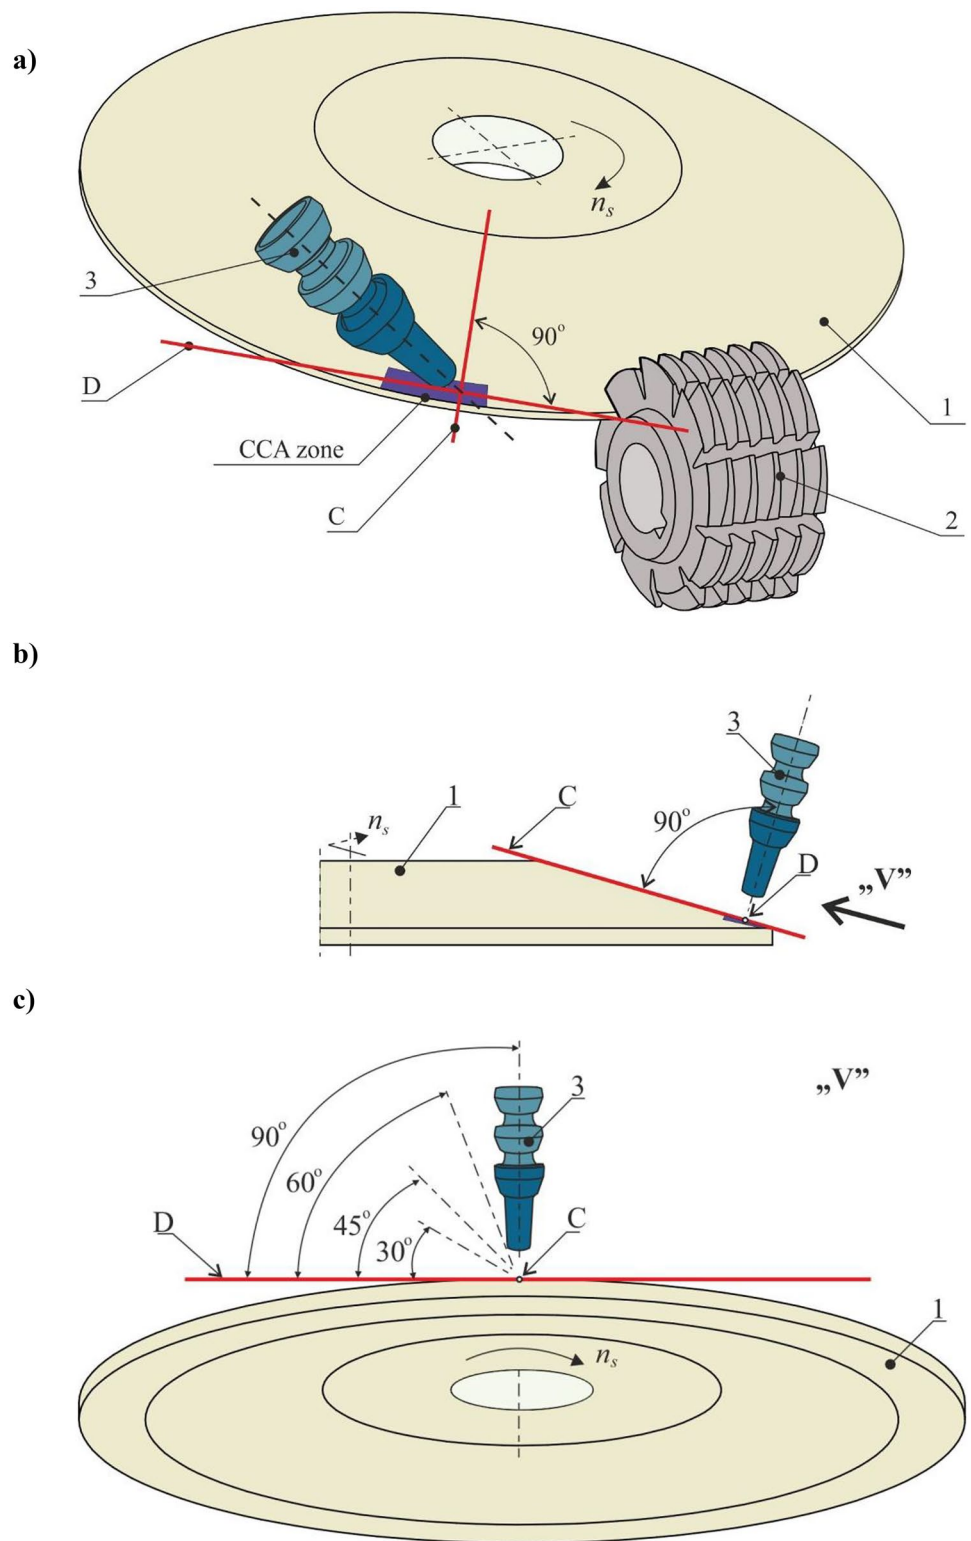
Location of area on grinding wheel active surface on which flow of cooled compressed cold air was directed (CCA area); 1 – grinding wheel, 2 – hob cutter, X – contact line of the hob cutter cutting edges with the grinding wheel, Y – conventional line parallel to X
